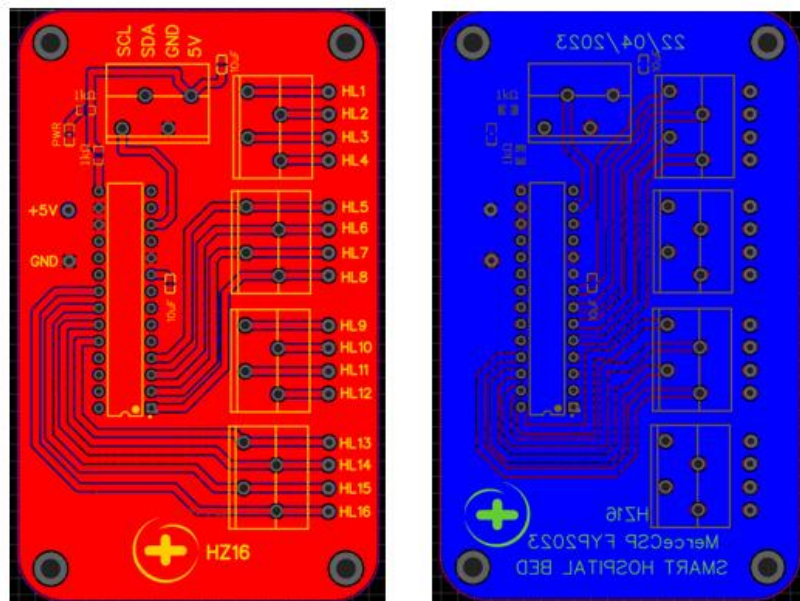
PCB for HZ16 Board: Front View (Left), Back View (Right)
